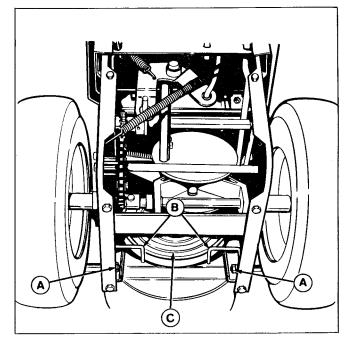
Auger Pulley Belt Stops (bottom cover shown removed)
